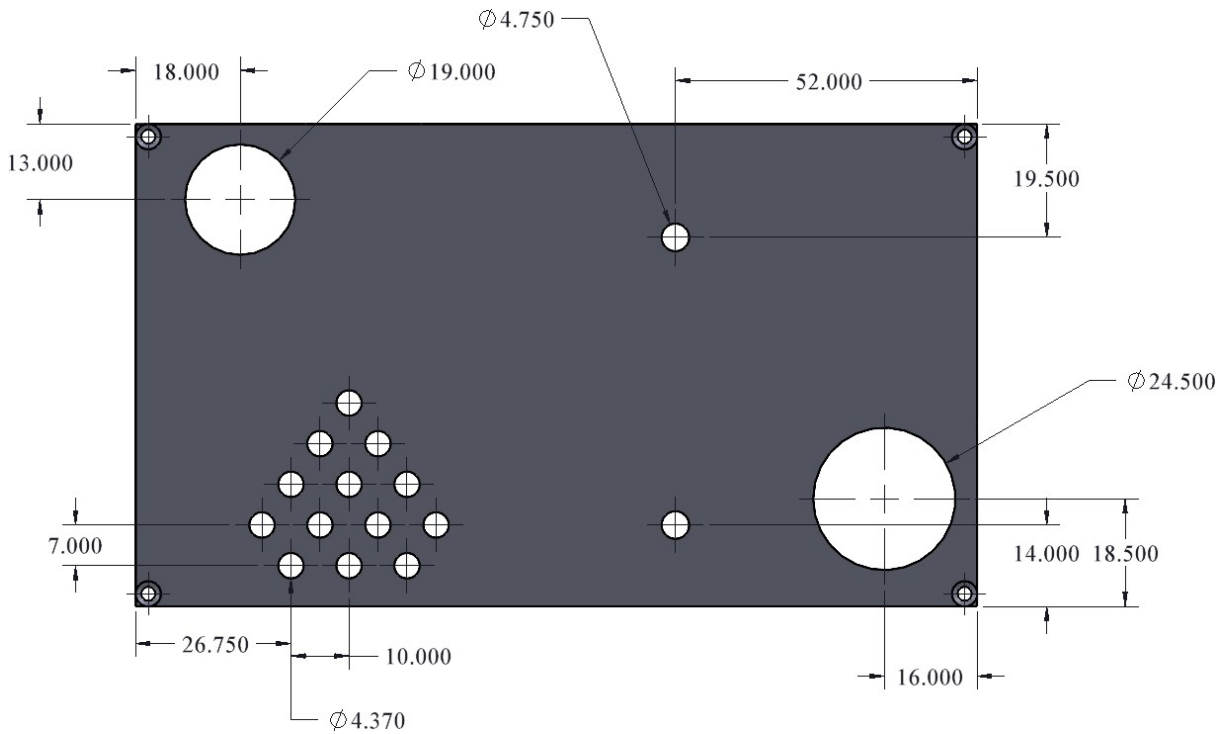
Side panel with push valve and solenoid. All holes are equidistant.
